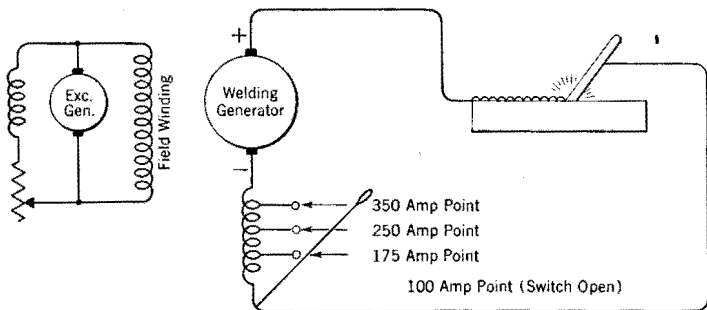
Schematic Diagram of Separately Excited Arc-Welding Generator
